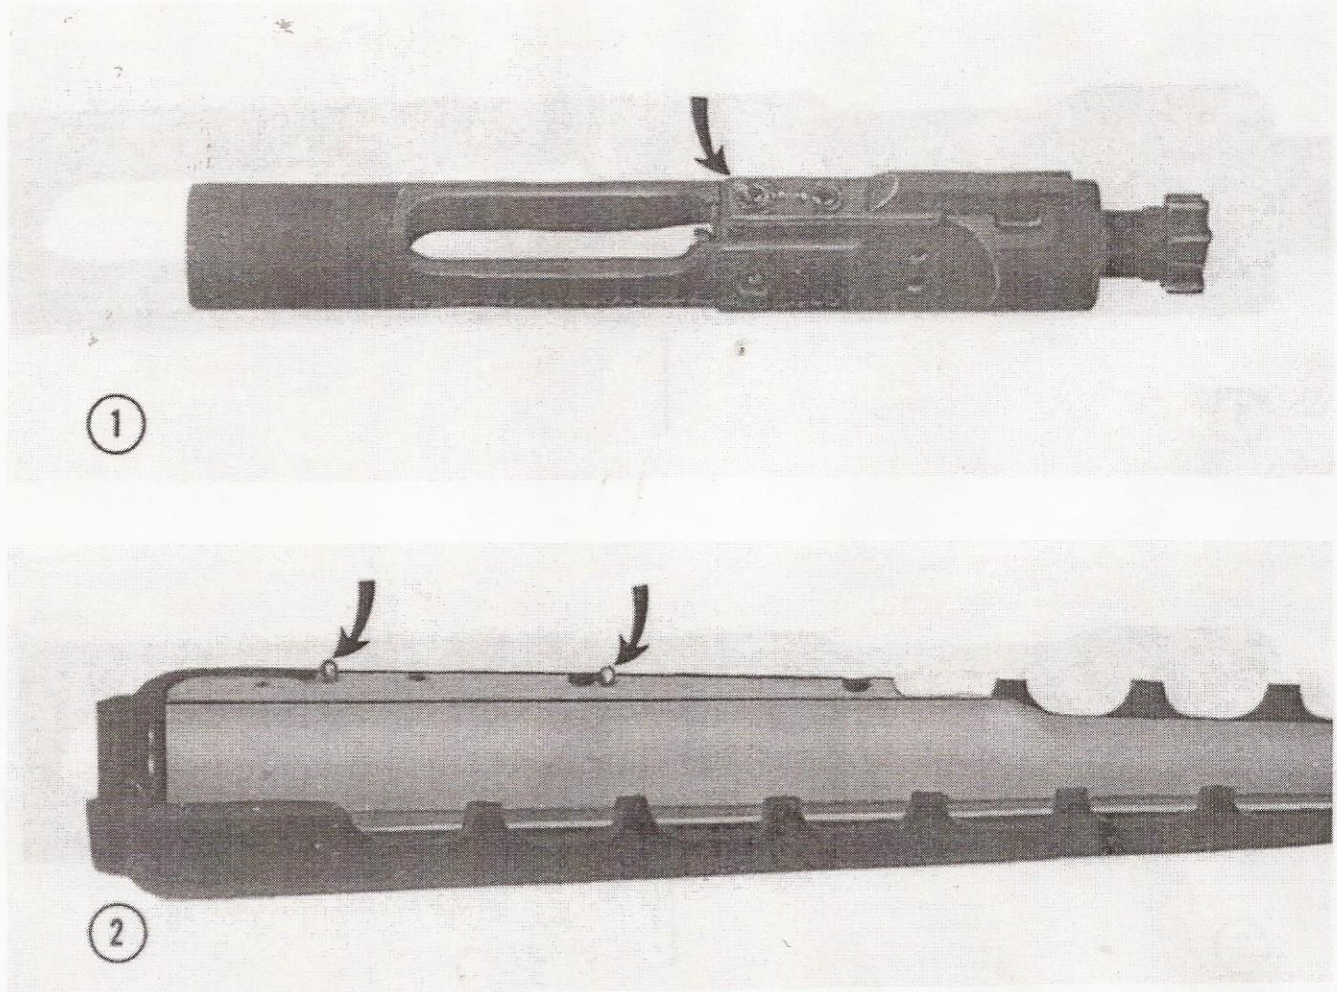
Top—Rear bolt carrier key screw has become unstaked and loosened approximately one-half turn. Bottom—loose rivets on handguard shield.
